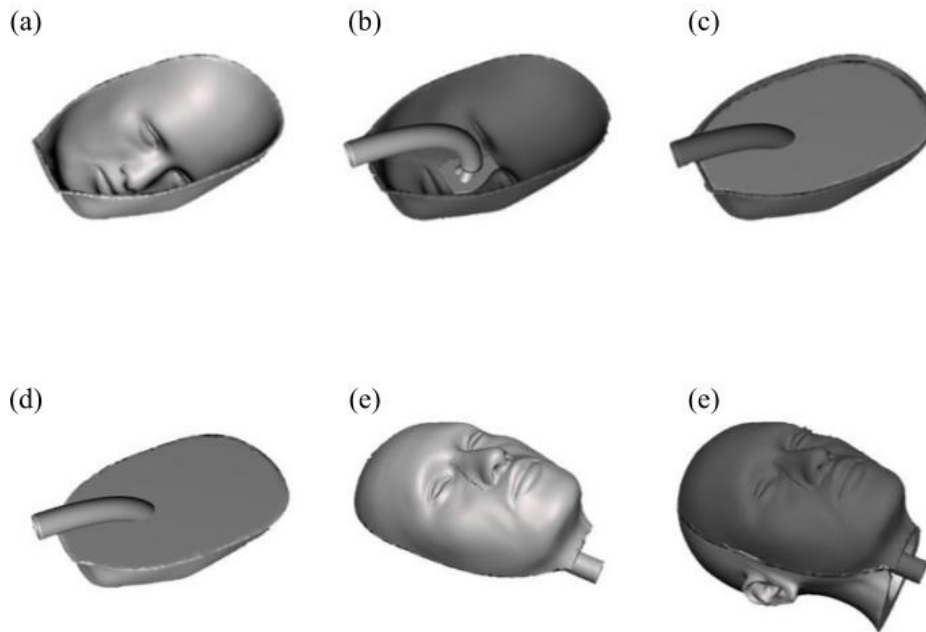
Conception steps of artificial heads. (a) printing of the front part mold (b) Printing Airways and nose (c) Silicon Casting (d)&(e) Mold removal (f) Back of the head gluing
